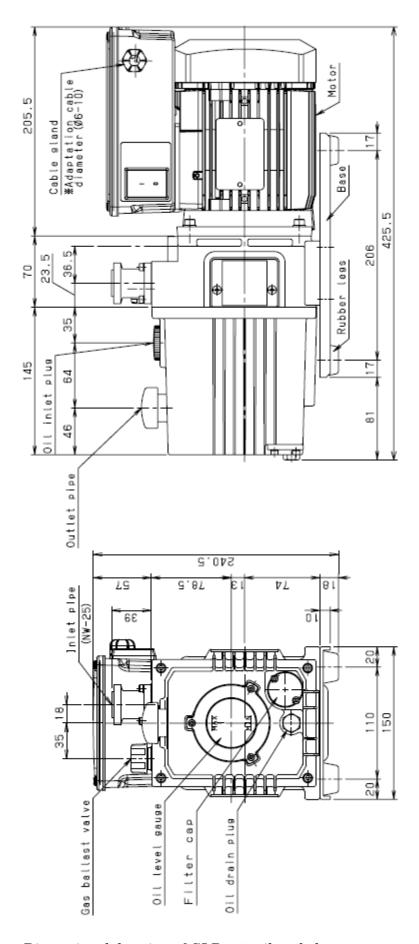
Dimensional drawing of GLD-040 oil sealed rotary vacuum pump
